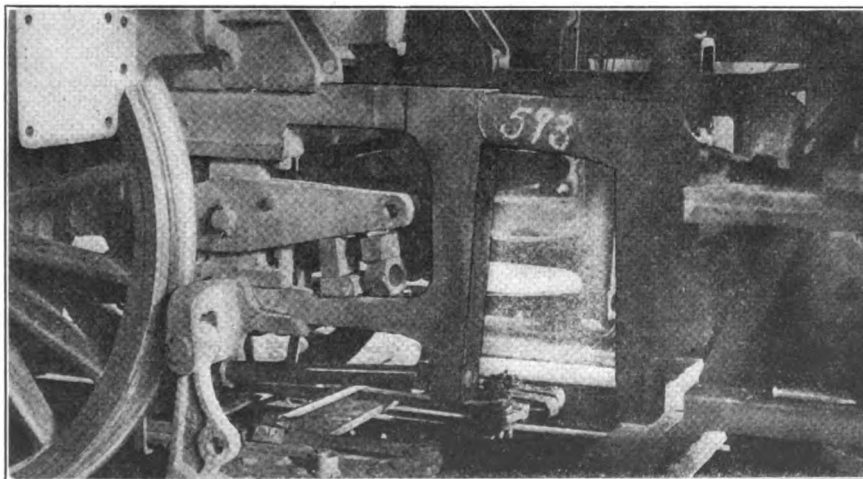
SHOWING A SIMILAR JOB WELDED IN FRONT CORNER OF JAW BY SAME PROCESS. AFTER THREE MONTHS' SERVICE FRAME BROKE IN OPPOSITE CORNER
